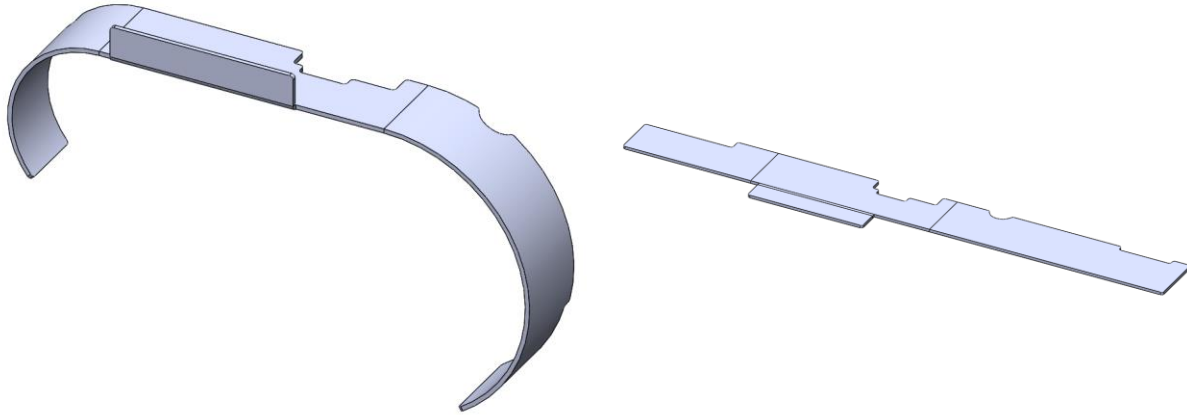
Scatter Shield Modelled Using SolidWorks Sheetmetal
